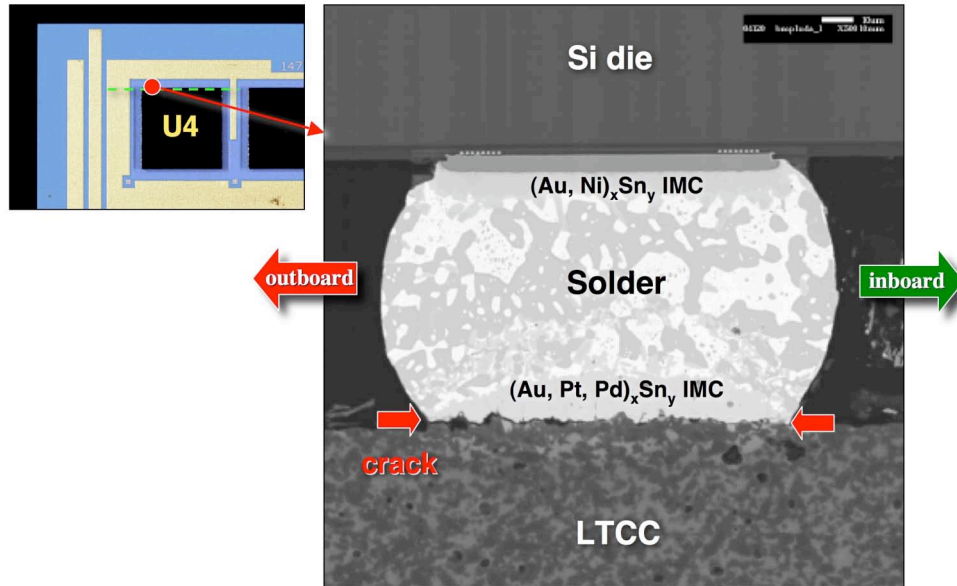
Stereo photograph identifying the location of the edge solder bump at the edge of the row on U04 of SF088 that underwent the burn-in treatment of 125°C, 282 hours and the SEM photograph of the solder joint in cross section.
